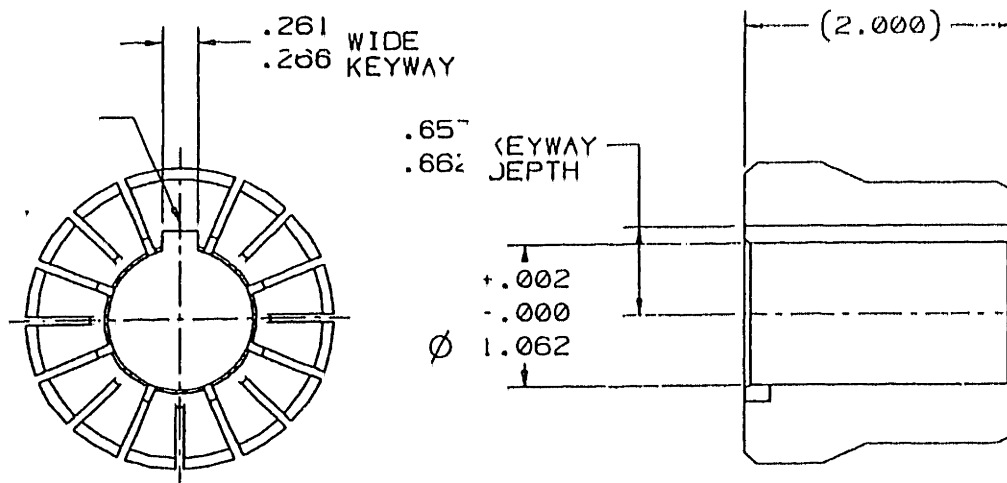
Design of special 1.062" collet for use on CNC grinding machine. This collet, along with three others for different size tool holders, allows tools to be ground without disassembling the tool assembly.
